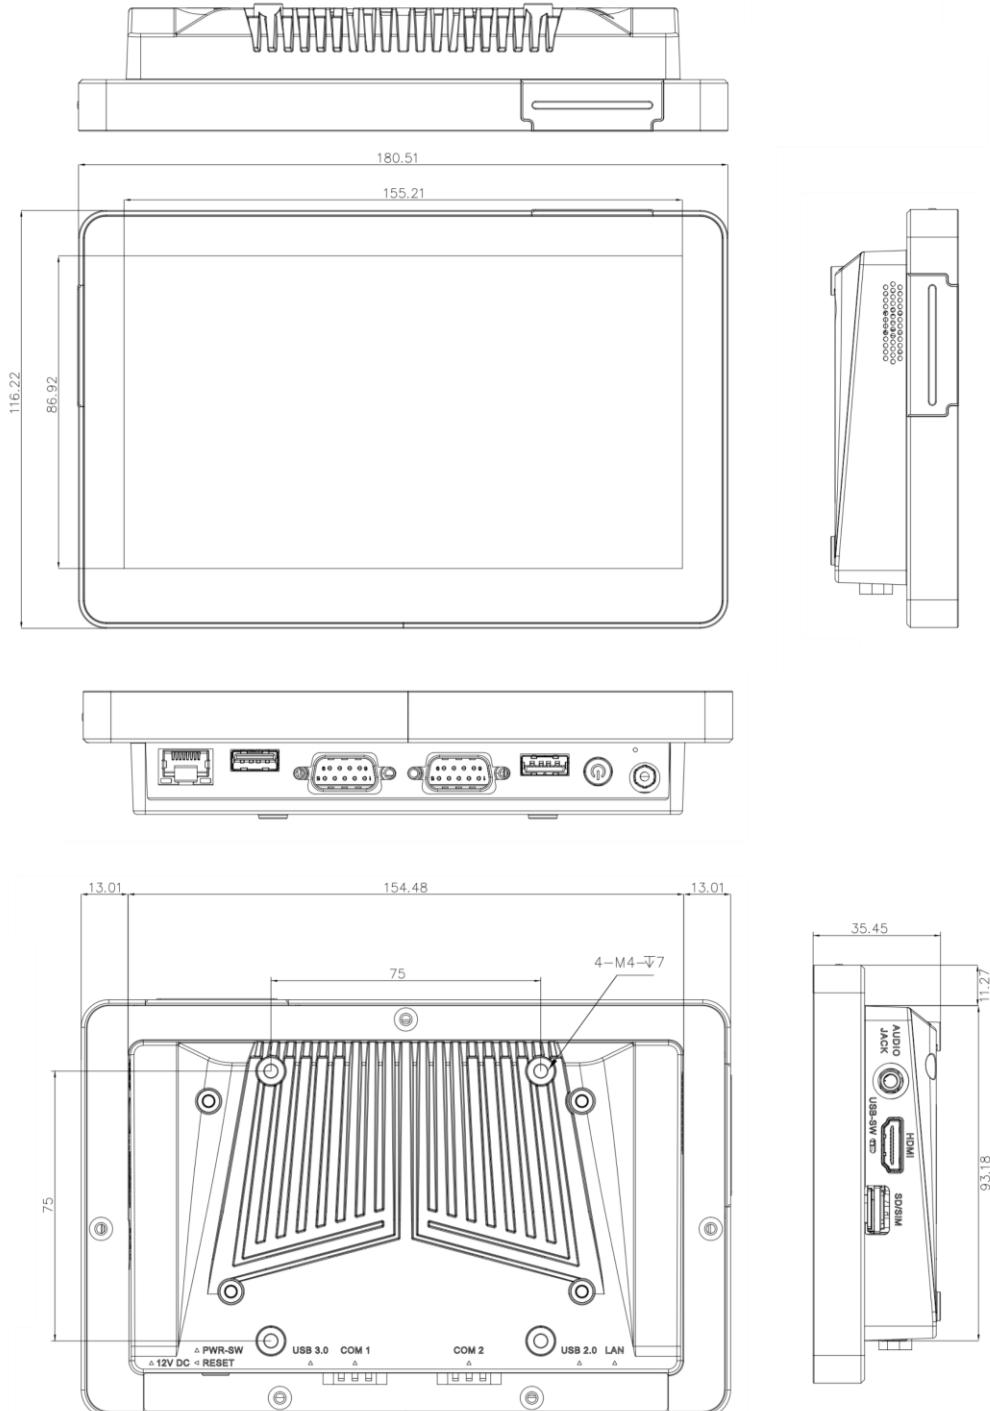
AFL4-W07-RK3566 Dimensions (mm)
